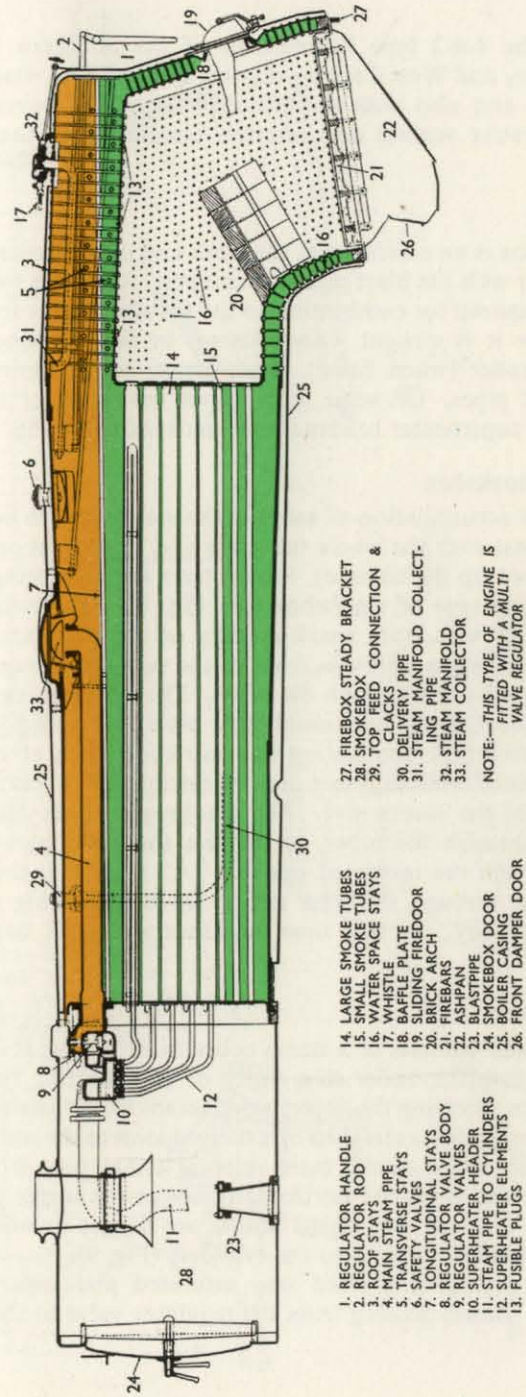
SECTIONAL VIEW OF BOILER WITH SUPERHEATER
